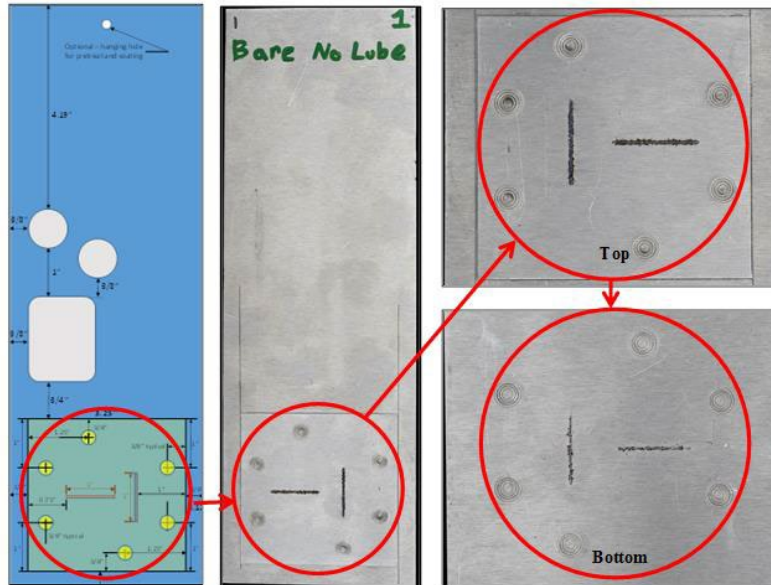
Mini-door assembly schematic (left) with three cut-outs as manufacturing features, full welded assembly (center), and close-up top and bottom views of welded area (right) for bare EFP Batch #3 material with no lubricant. Source: AET.
